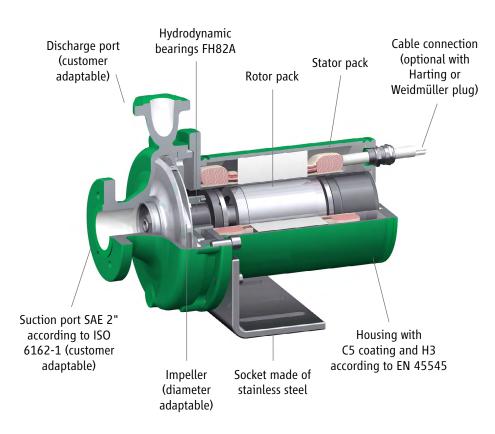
3D sectional view of LC32-160 with AGX3.0 and standard cable connection
